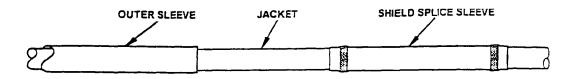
Double Shield Cable Repair with Mini-Seal Crimp Primary Splice (Sheet 2)
